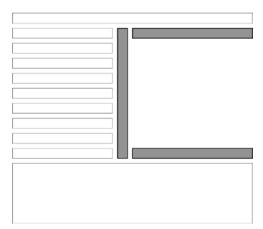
This shows how one might build up a component through an additive way of making. The single component is actually an assembly of much smaller parts. The opening to the right of the assembly is achieved by altering the size and configuration of elements rather than cutting away at the component.
